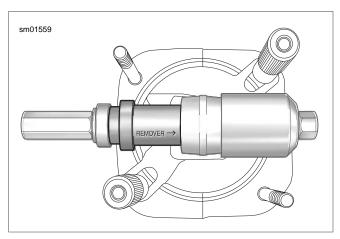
Remover Stackup. Use Remover Side Of Remover/Installer
